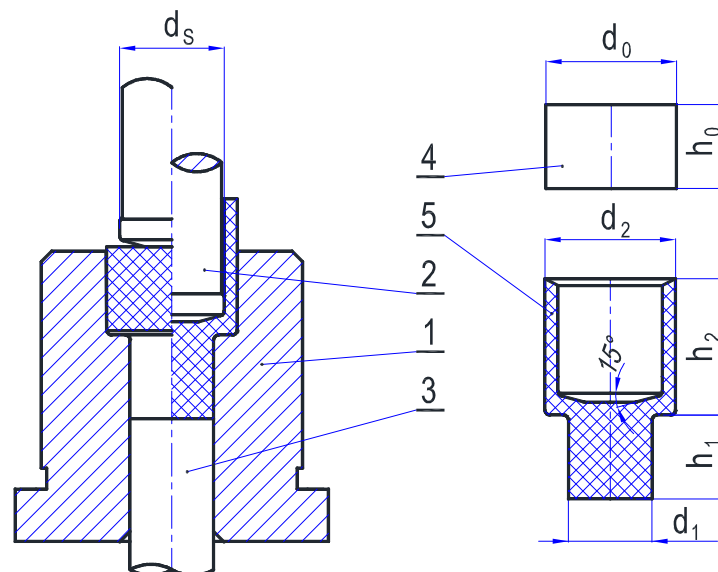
The scheme of combined extrusion of aluminum stampings using conical punch: 1 – die; 2 – flat-conical punch; 3 – ejector; 4 – billet; 5 – die stamping.
